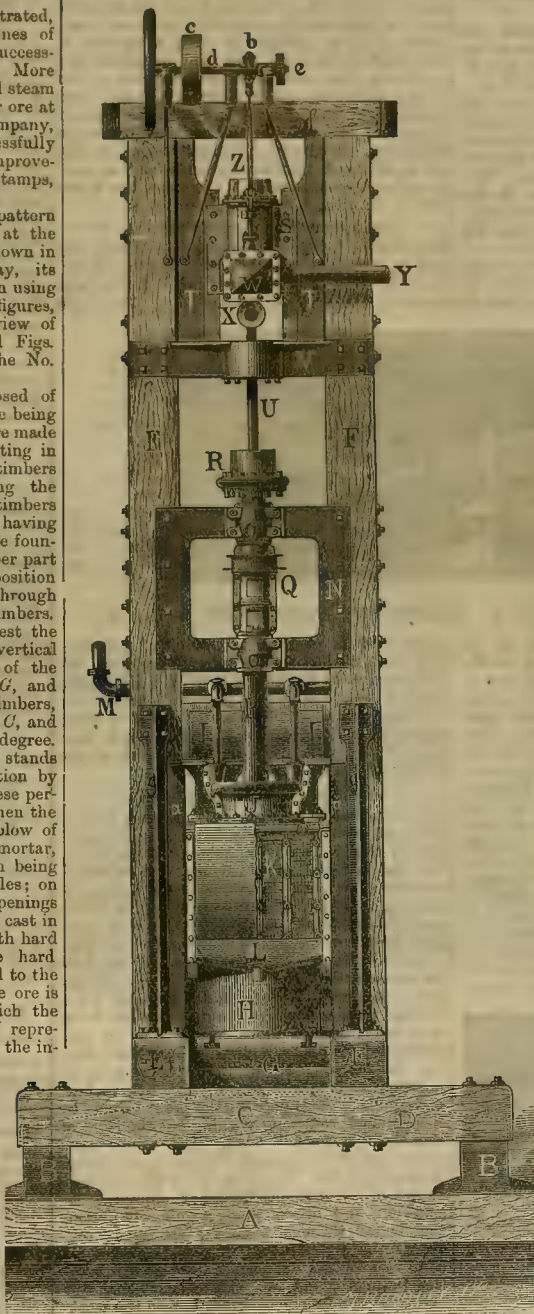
FRONT VIEW OF BALL STEAM STAMP.
